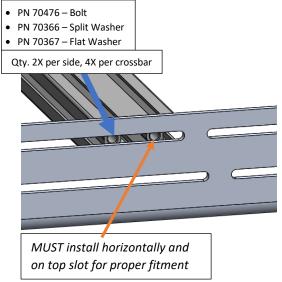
Crossbar Fastening to Side Rail Subassemblies
